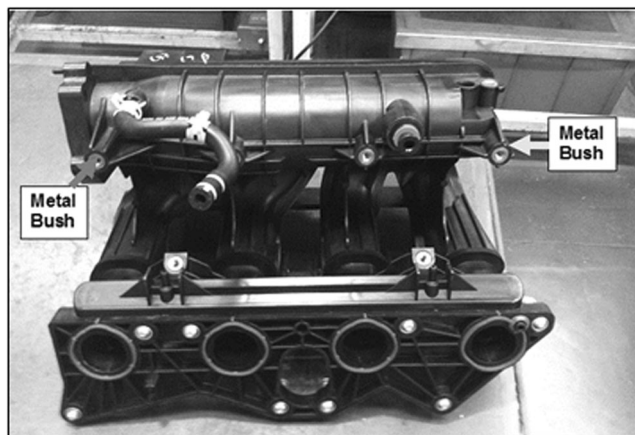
Engine intake manifold collector with several brass threaded inserts
